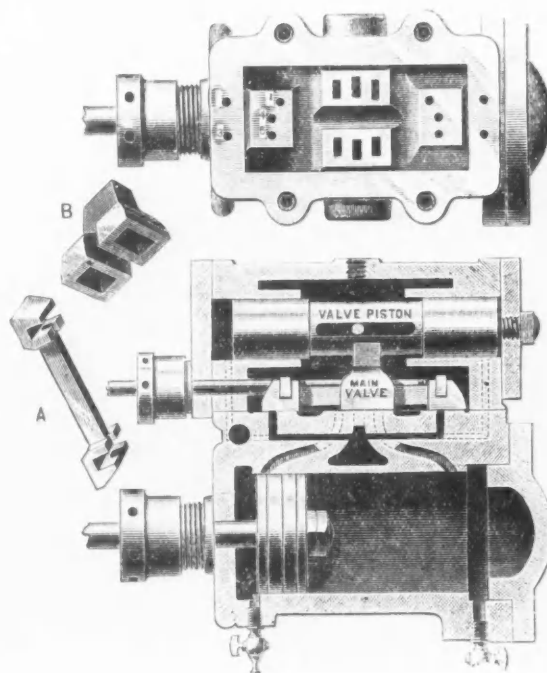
Plan of Valve Seat and Section of Valve and Steam Cylinders.
